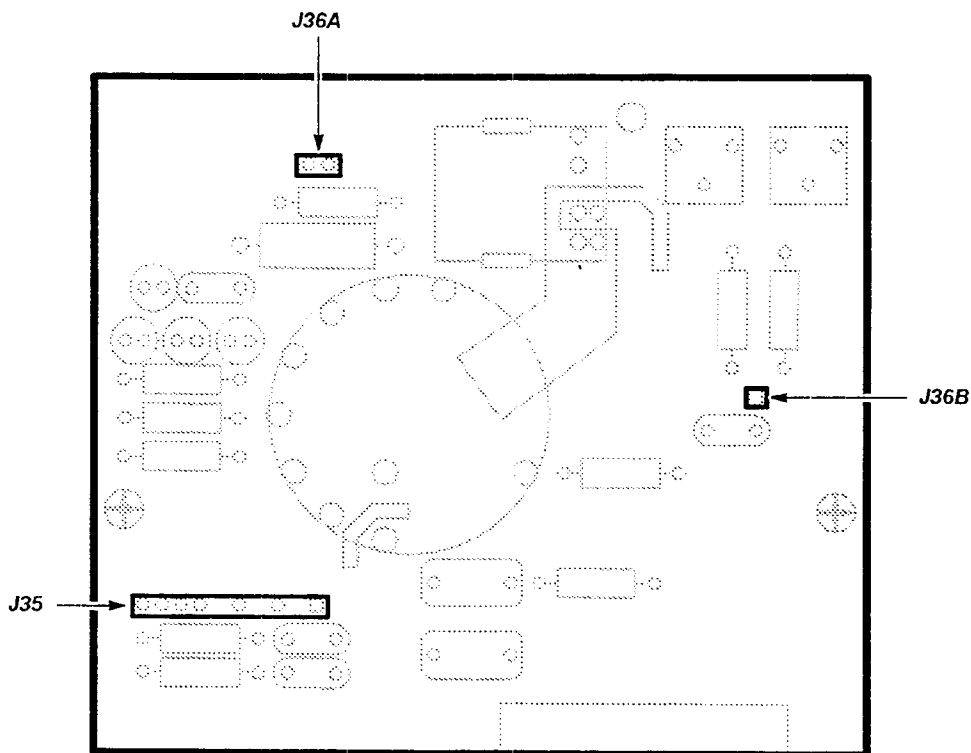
Removing/Replacing the A27 CRT Socket Board
